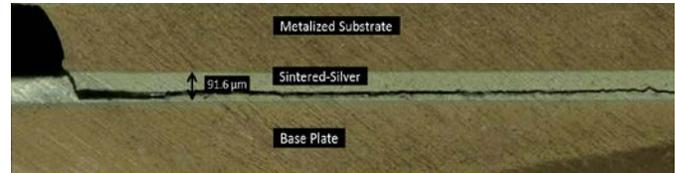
Cross-sectional image of crack in the sintered silver joint.
